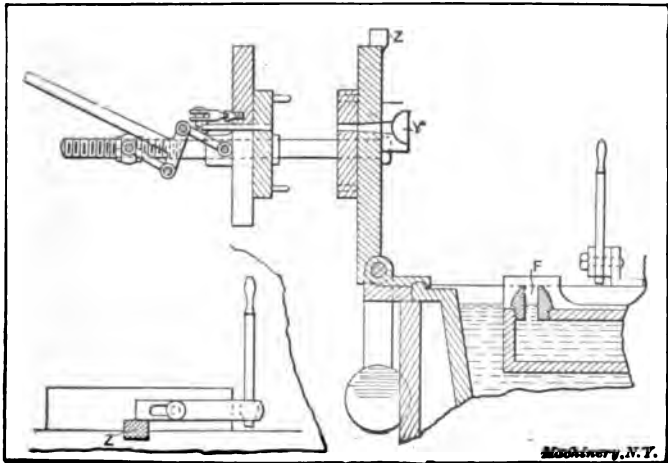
Tilting Mold Table and Method of Parting the Mold
